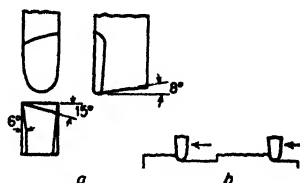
Tool No. 2. (a) Right-hand round-nosed roughing tool; (b) Application of the tool. (The G. A. Gray Company)
